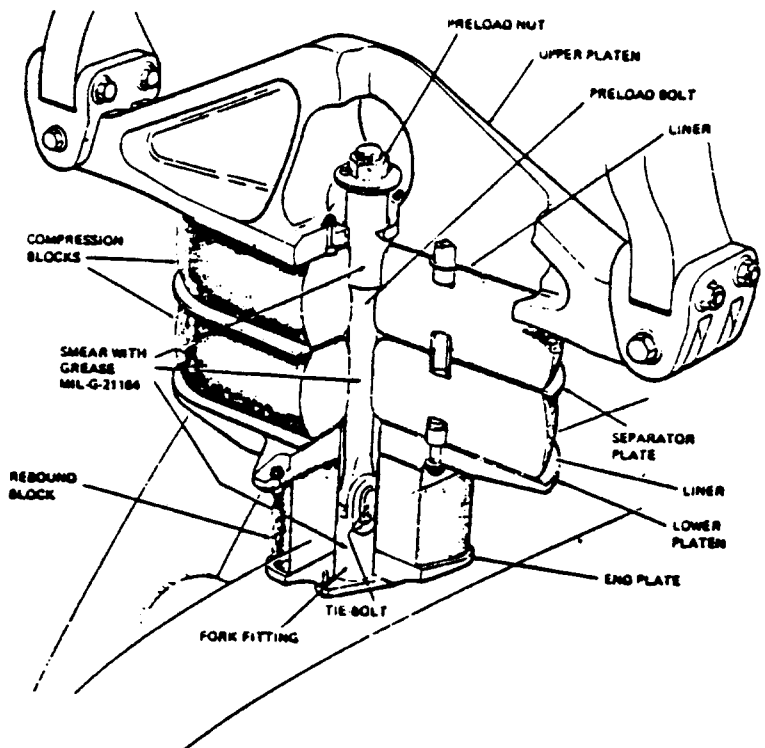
Fixed Main Gear Layout: DHC-Twin Otter
